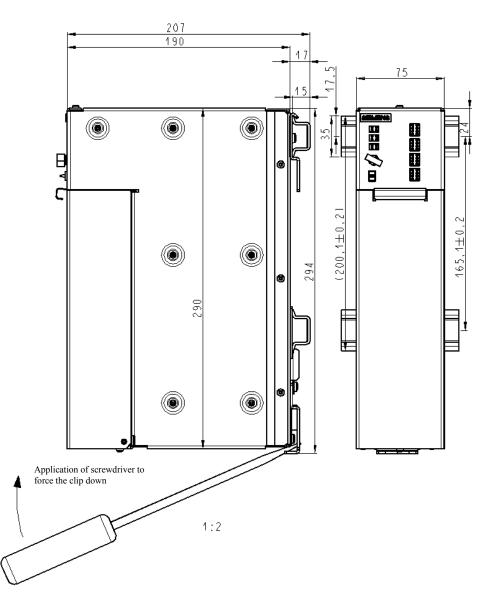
Dimensional drawing of the DIN rail mounting
